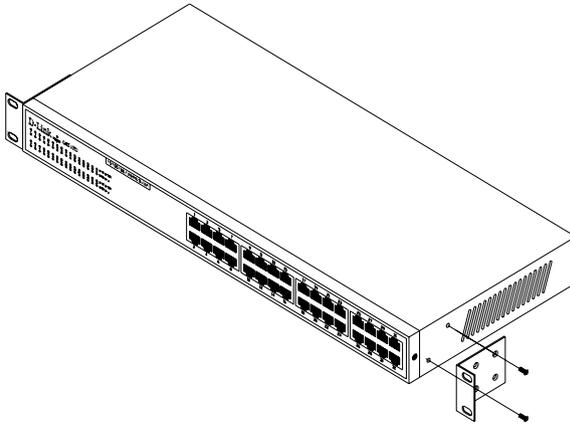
Attaching the mounting brackets to the 10/100 Fast Ethernet DES-1032
